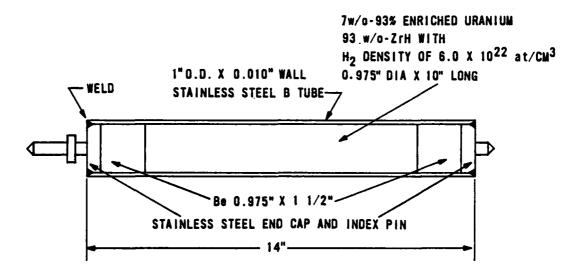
SER fuel-moderator element assembly (after Ref. 3).
